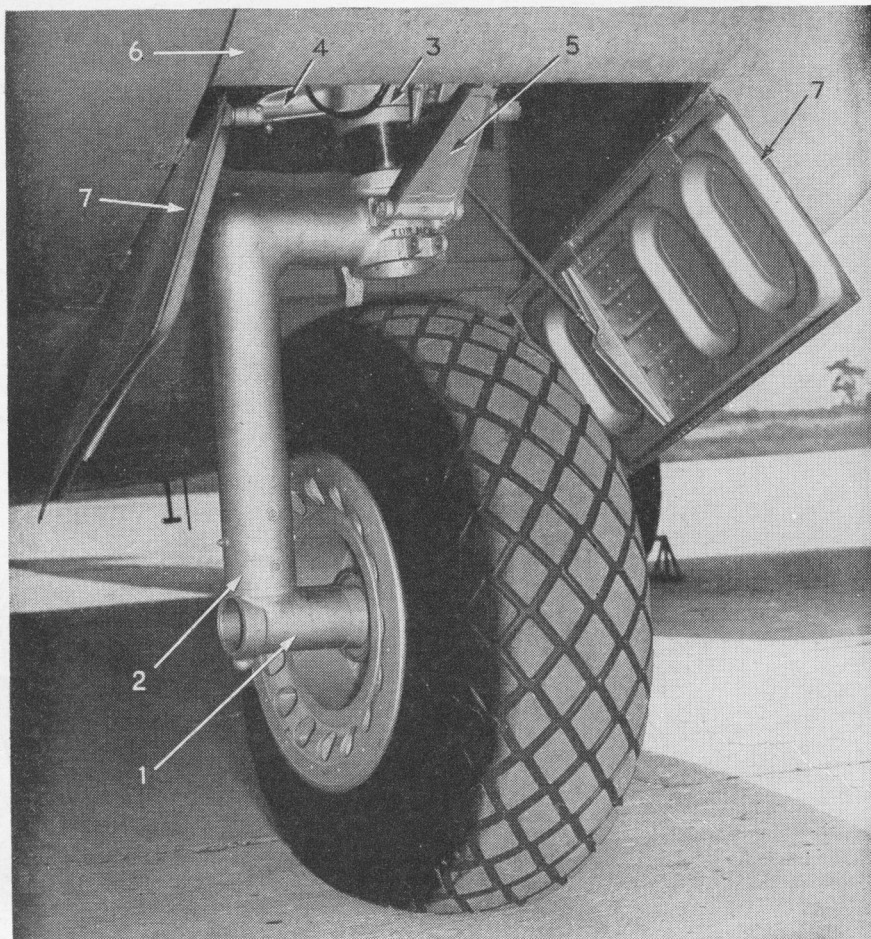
Nose gear: (1) axle unit; (2) side strut; (3) shock strut; (4) cantilever arm; (5) scissor; (6) front door (closed after gear is extended); (7) rear doors.
